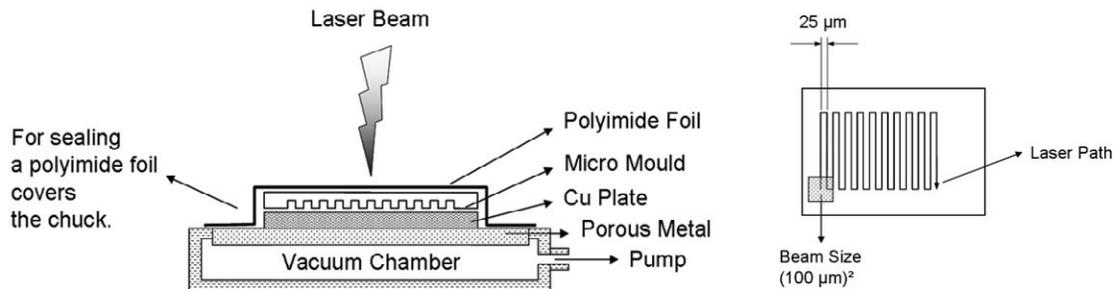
(a) sketch of the experimental set-up used; (b) Scanning path of the laser beam across the workpiece during the laser embossing process
